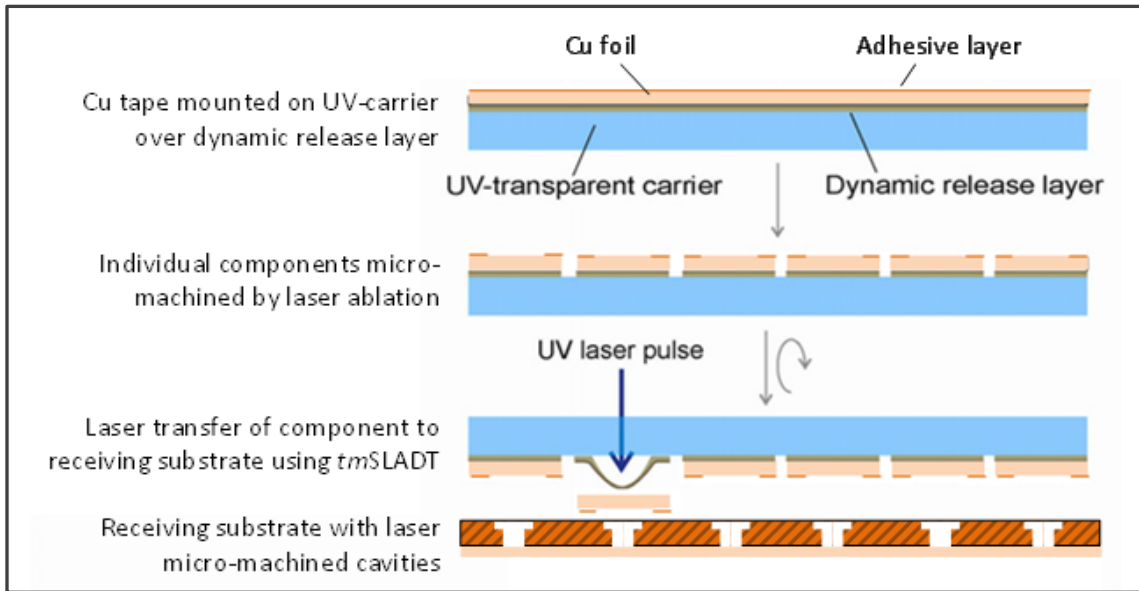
Main steps in magnetic switch fabrication and assembly by Laser-Assisted Advanced Assembly.
